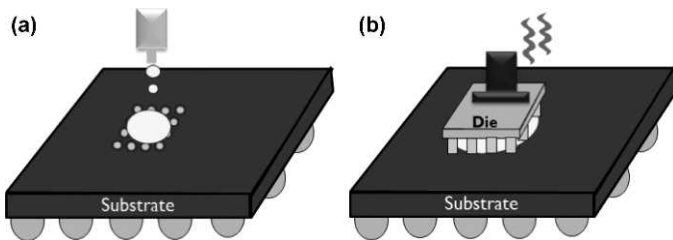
Assembly process in case of NUF: (a) UF dispensing; (b) Die flip chip (typically thermo-compression bonding).
